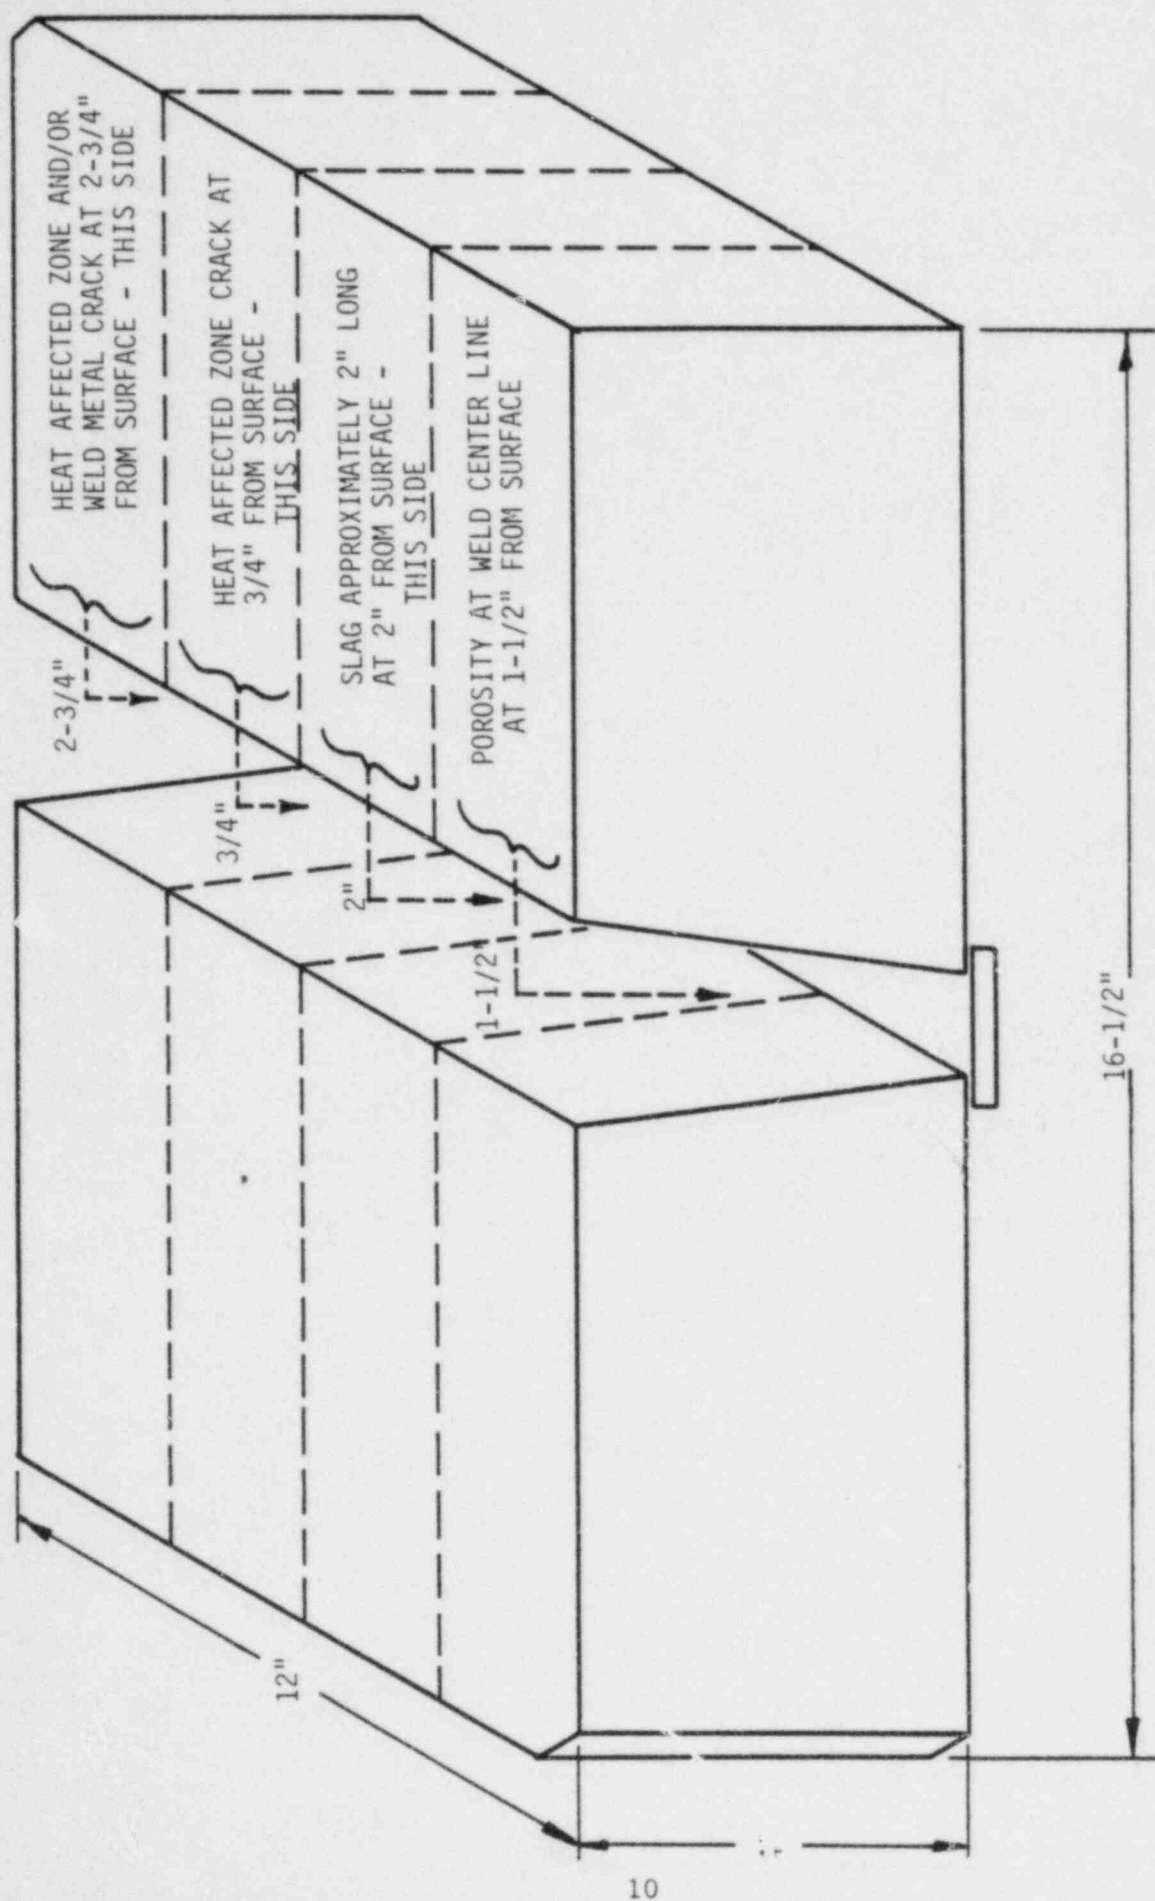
BUTT-WELDED CARBON STEEL PLATE SPECIMEN - POROSITY
